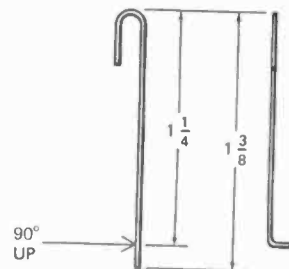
WIPER CONTACT springs are formed to connect conductive strip to the keys.
